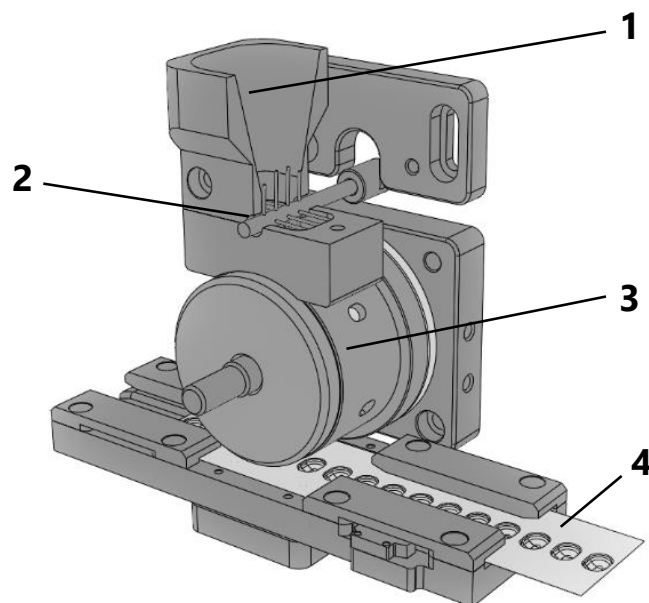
Filling element of in-house made blister machine in detail. (1) Powder reservoir, (2) Powder feeding impeller, (3) drum with powder cavities, (4) blister foil with preformed cavities. Image was created with SolidWorks®
